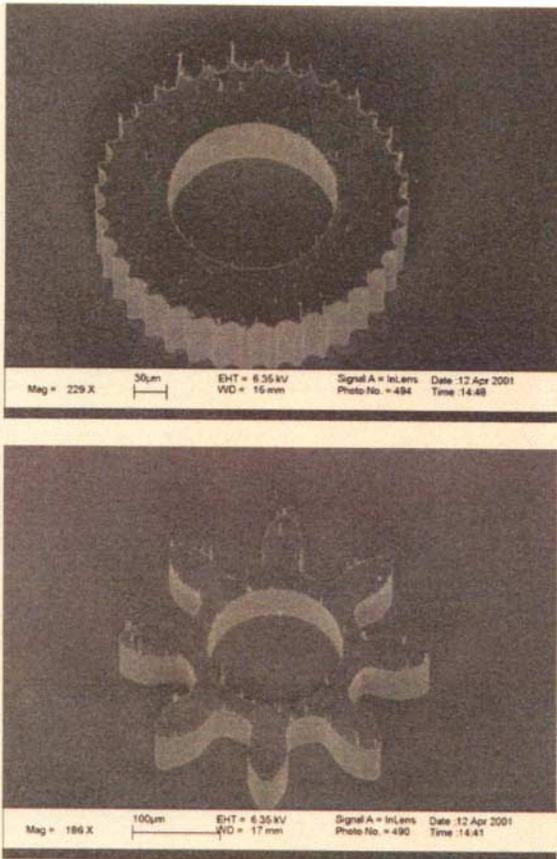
SEM images of 36-tooth (above) and 8-tooth (below) spur gears in the micro-rotary engine housing
